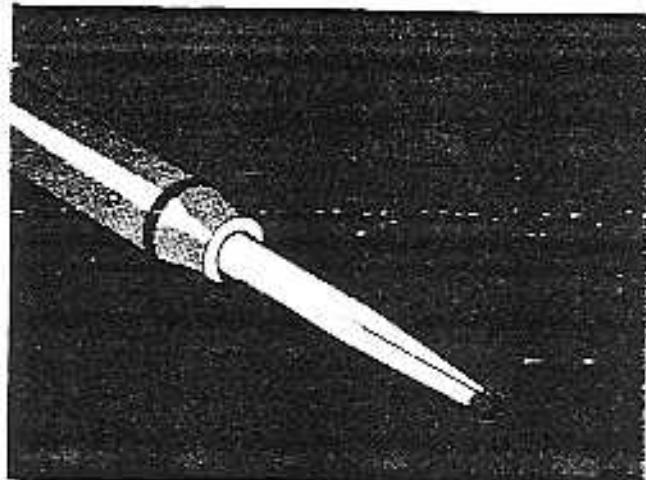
Soldering iron tip properly shaped and tinned.
